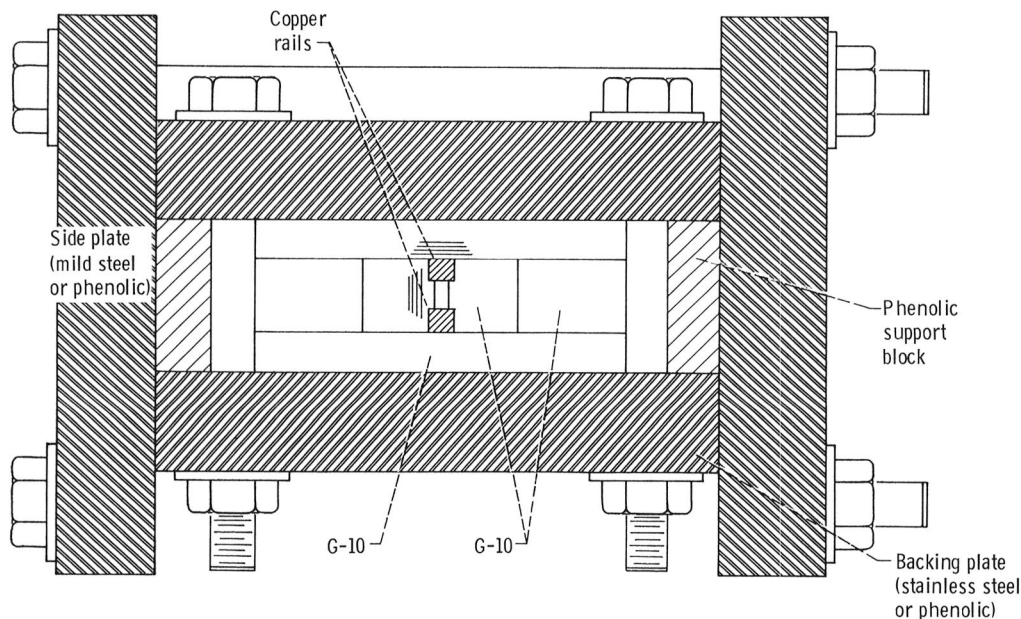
1-m-long, 4- by 6-mm-bore, design D, rail accelerator; double squeeze assembly.
